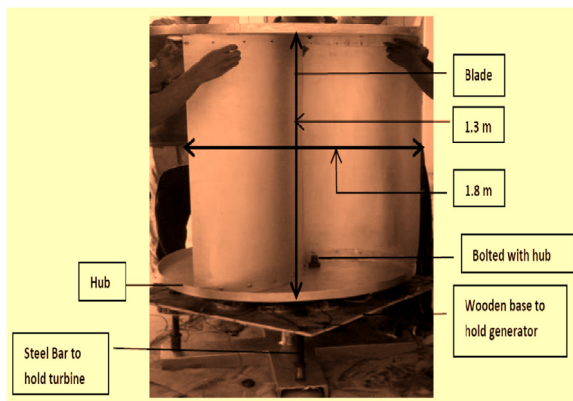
A side view of designed and assembled blade configuration of VAWT.
